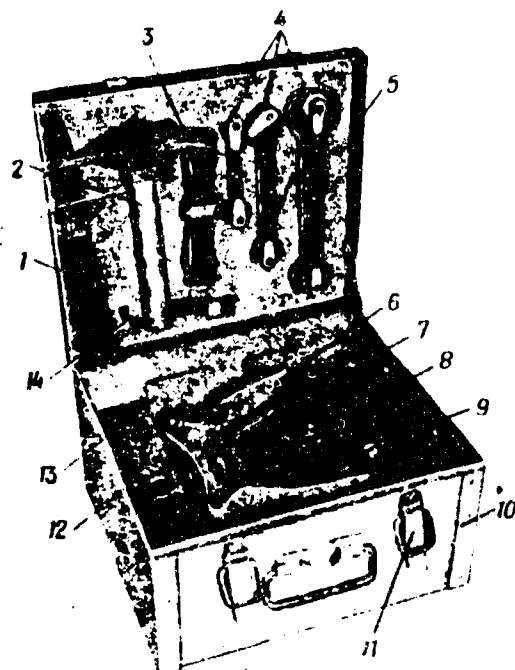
Tool Kit for Underwater Welding and Cutting: 1 - flat wire brush; 2 - hammer-cutter; 3 - end type wire brush; 4 - open-end wrenches; 5 - lid; 6 - fitting for oxygen tank; 7 - clamp; 8 - EPS-2 electrode holder; 9 - reducer; 10 - box housing; 11 - lock; 12 - compartment for expendable material (cloths, lashing wire); 13 - official location for documentation; and 14 - special key.
